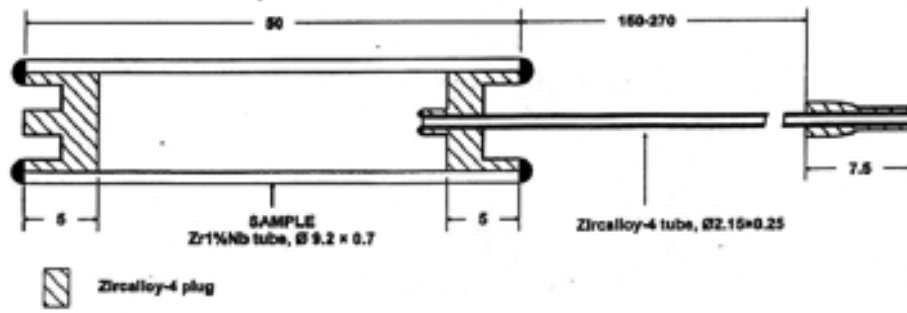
Drawing of the tube specimen for single-rod ballooning tests performed at AEKI [42]. Note that Zircalloy-4 tubes were used for the PUZRY tests.
